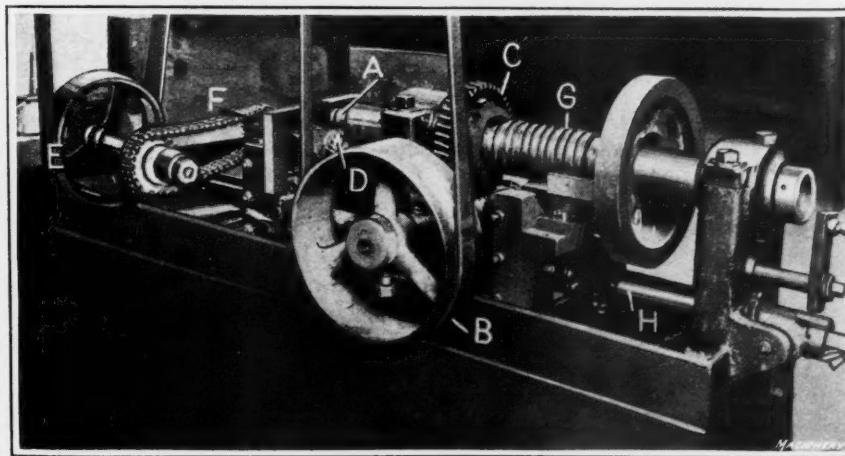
T. C. M. Thread Milling Machine set up to mill Relief in Knurls
